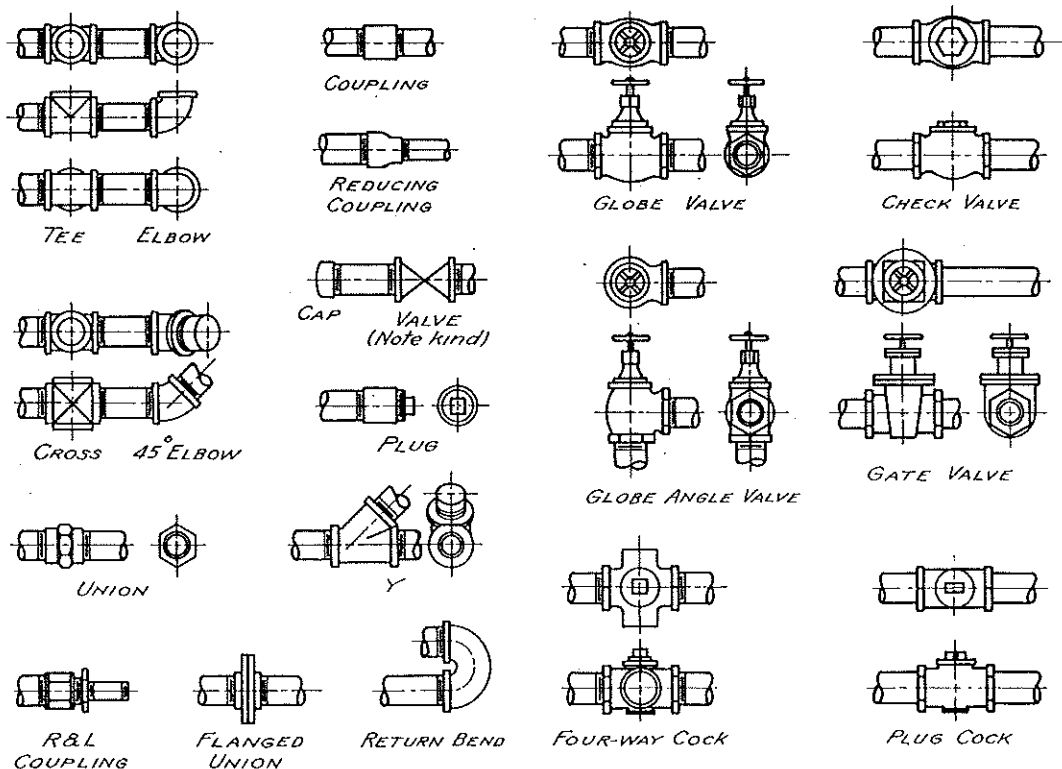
Double-line pipe and valve symbols for screw fittings.
